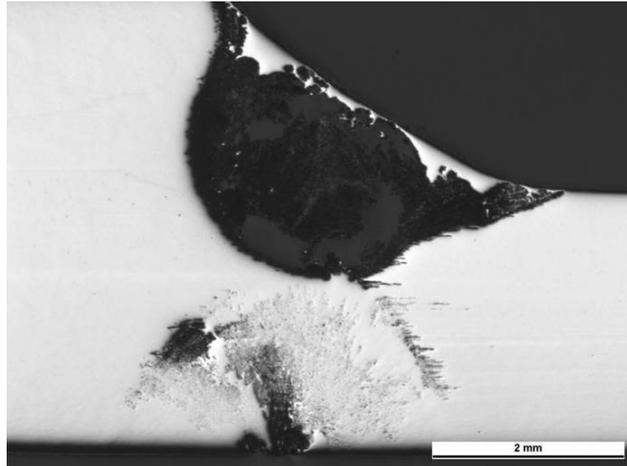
Cross section through the corrosion attack in Fig. 5. Internal weld pass is fully dissolved by corrosion, the external weld being porous from selective attack in the ferrite phase.
